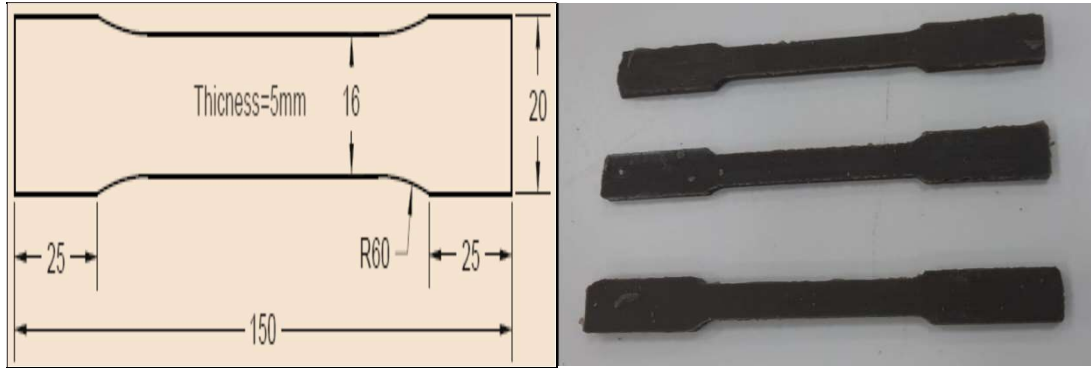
Shape and dimensions of the sample prepared for tensile testing.
